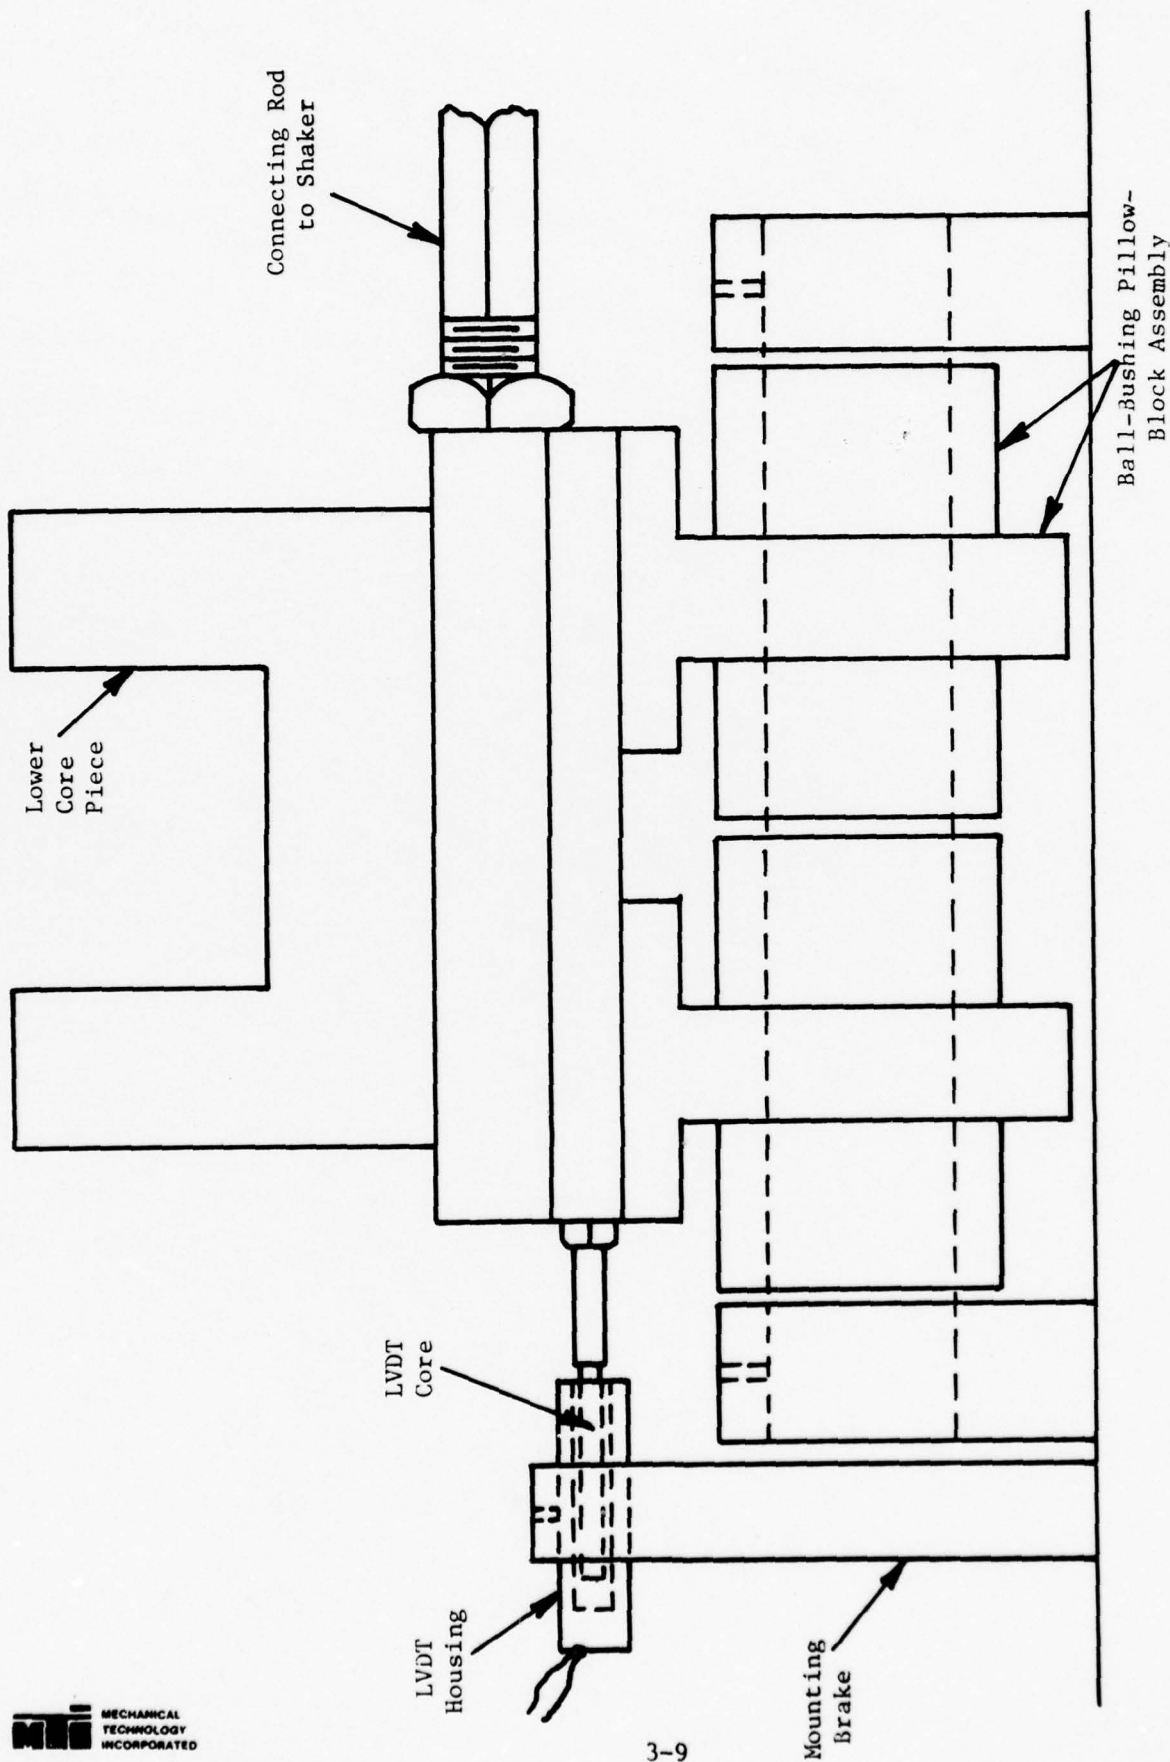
Lower Core Piece Drive and Position Sensing Arrangement
